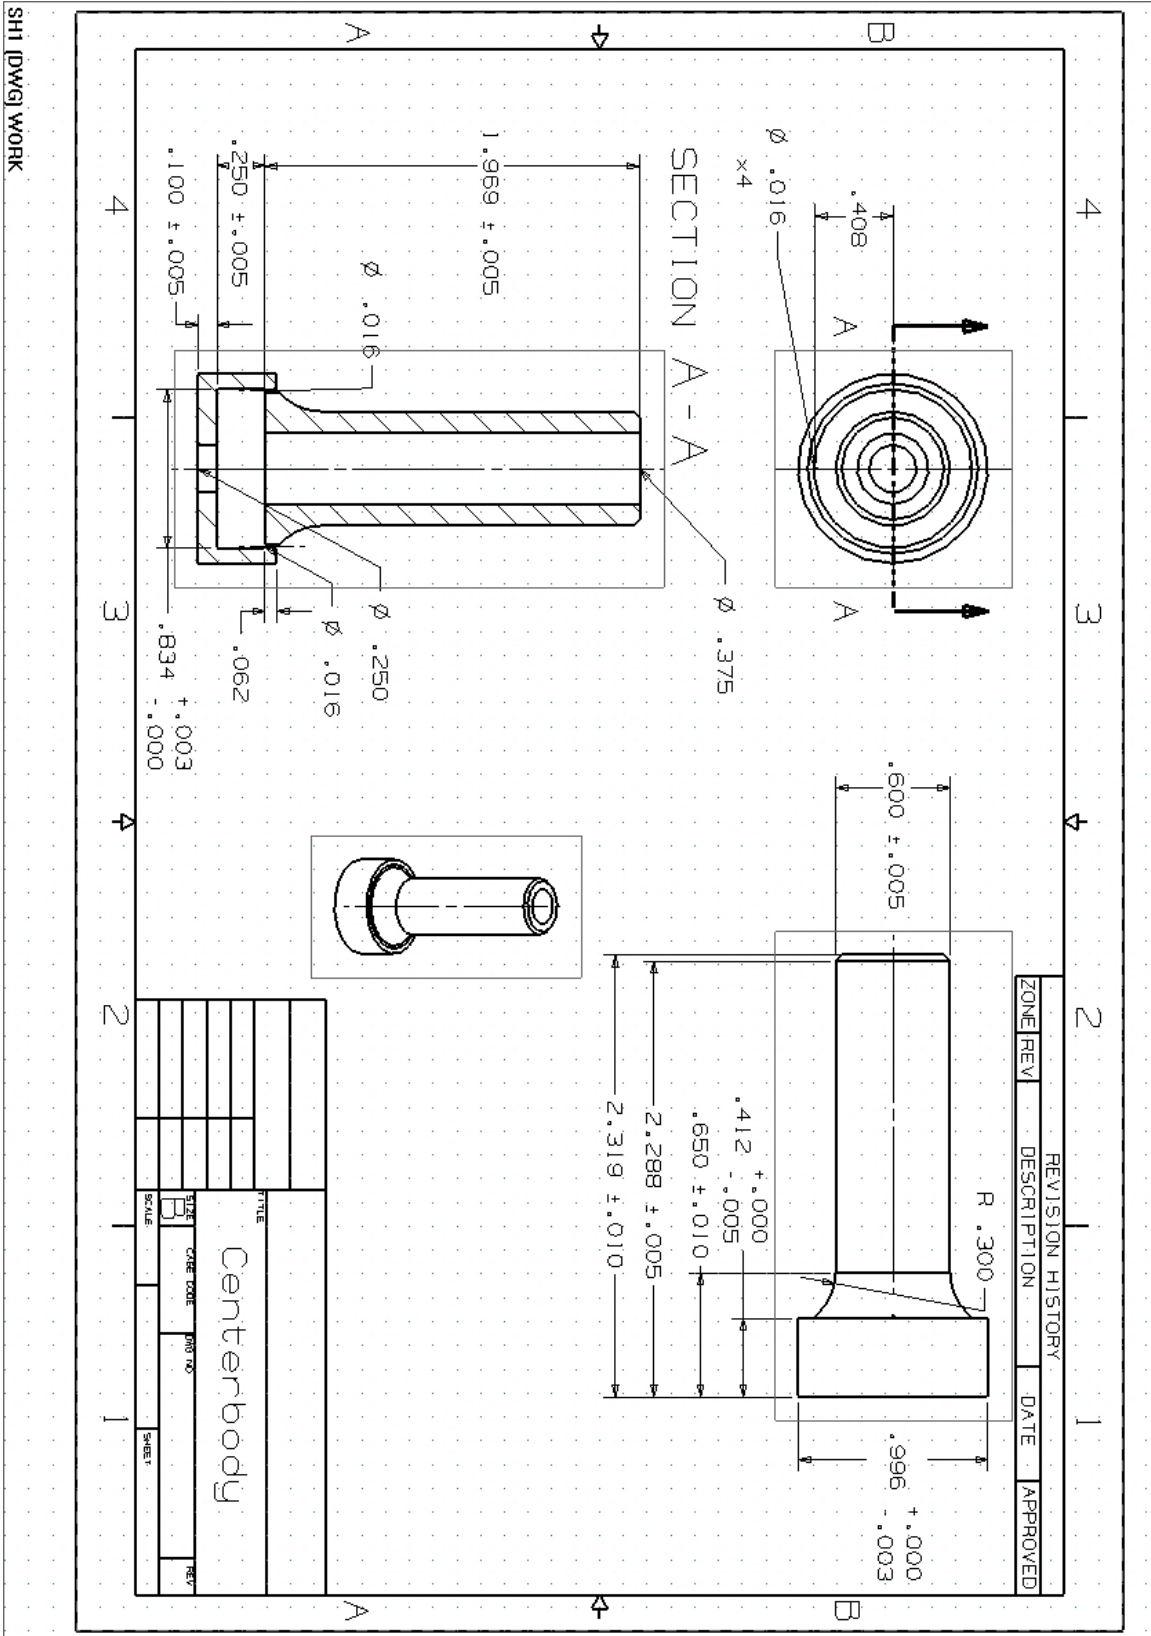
Engineering Drawing of the Centerbody of the Injector
